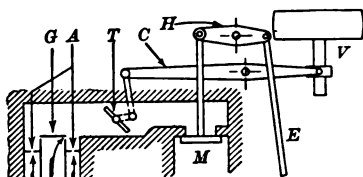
QUANTITY GOVERNING. THROTTLING FOR FULL STROKE WITH BUTTERFLY VALVE
